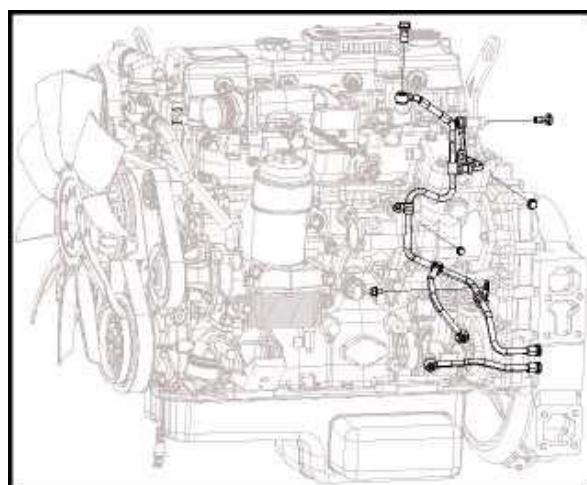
Drawing to remove the oil pipe bracket assy.
